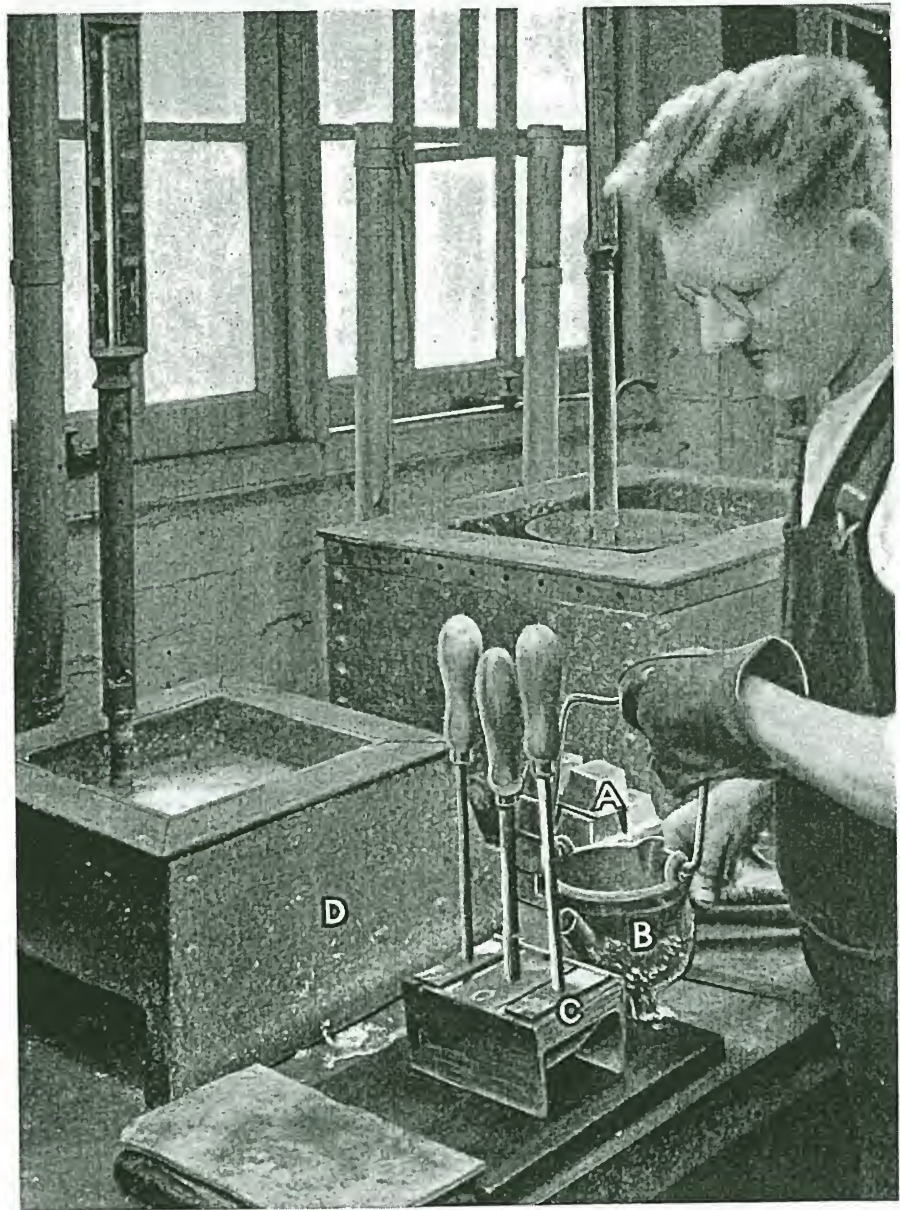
PLATE VB. POURING BEARING METAL INTO THE MOULD CONTAINING THE TINNED SHELL
